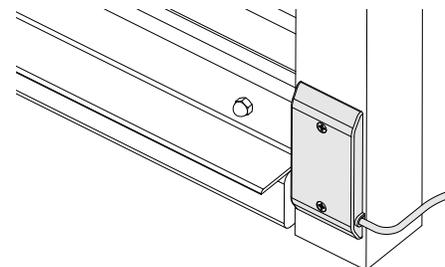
A: Sectional Doors: Transmitter Bracket Assembly
